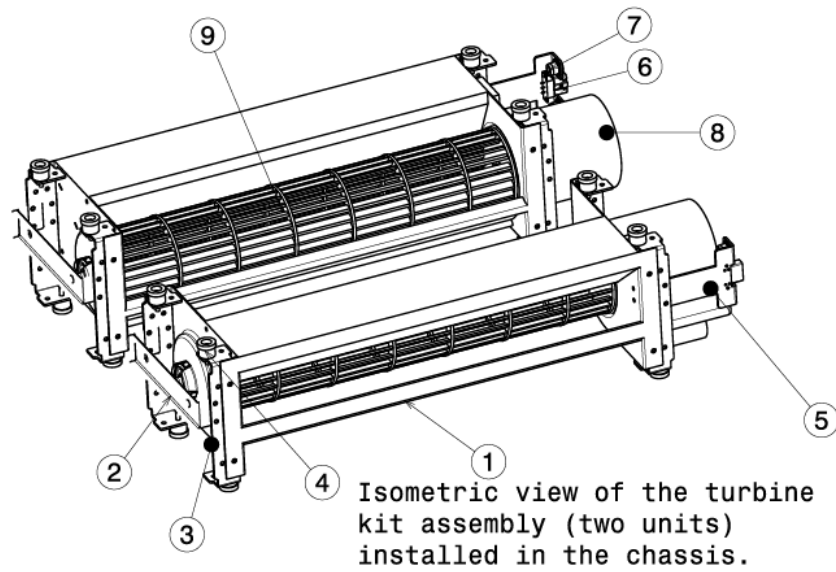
External Isometric View of the Chassis Assembly - 645.5 mm in length
